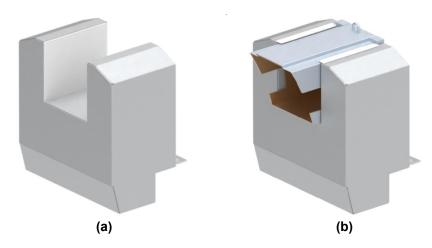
(a) Valve Protecting Device (VPD) without Housing, and (b) VPD with Housing
